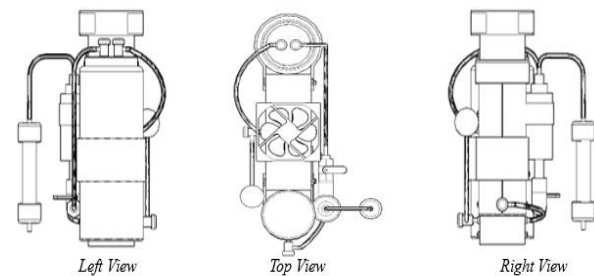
Orthographic Drawing of the Motorcycle Fuel Enhancer.
